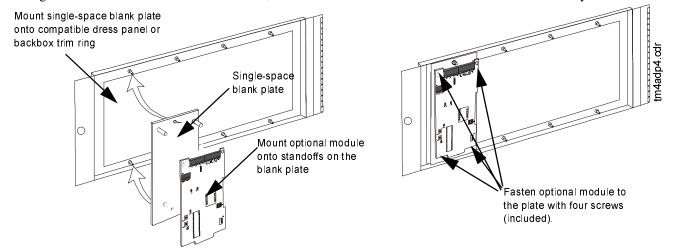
Mounting a Single-space Blank Plate onto the Dress Panel with Optional Module
